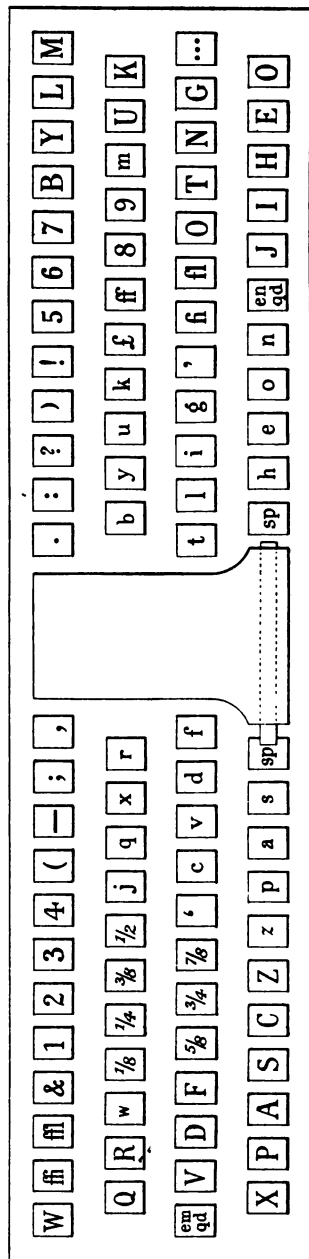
Keyboard of Composing Machine (Pulsometer). 3rd full size.
